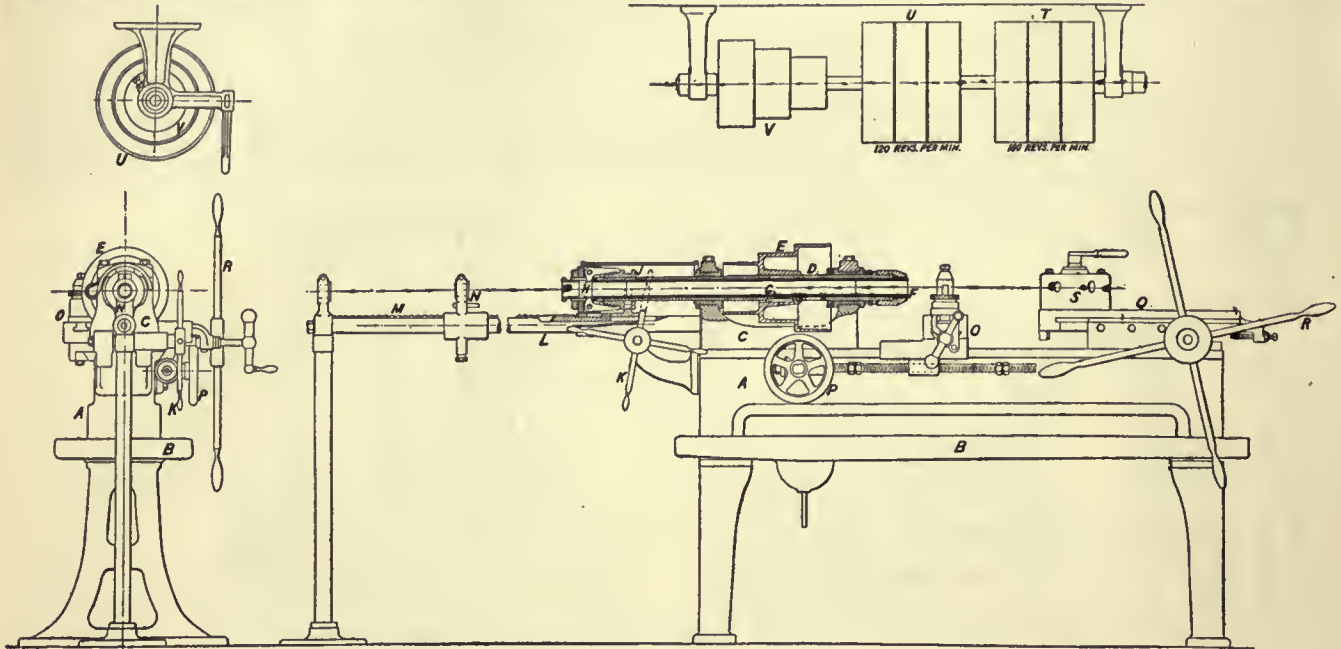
Turret, Lathe. (Webster & Bennett, Ltd., Coventry.)
